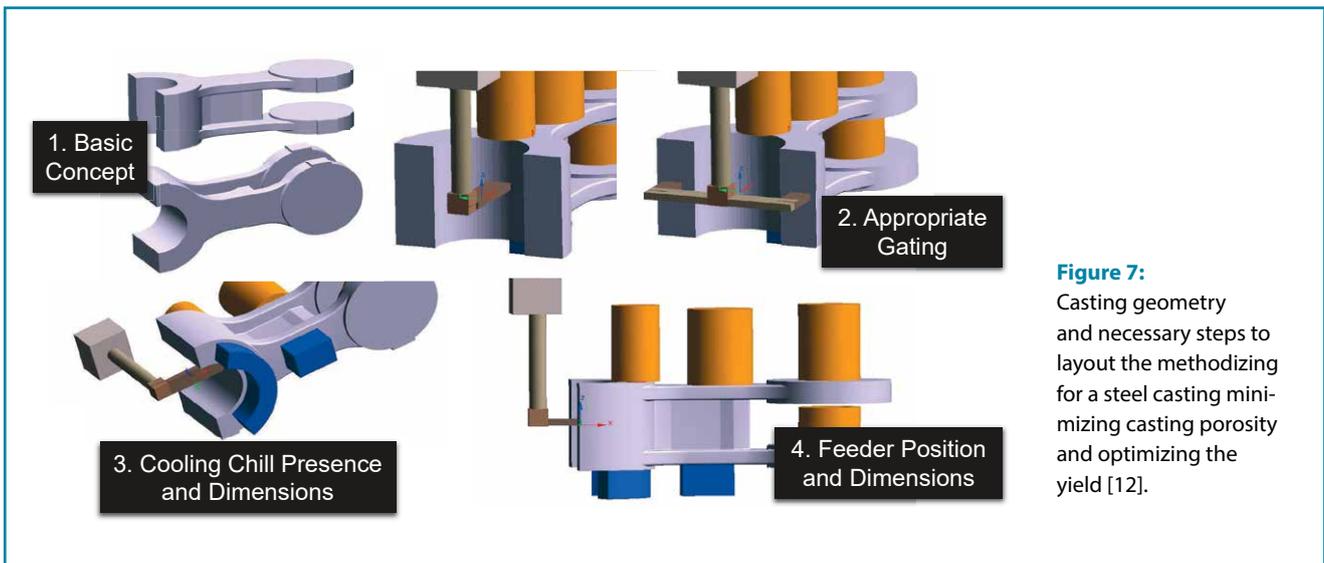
Casting geometry and necessary steps to layout the methodizing for a steel casting minimizing casting porosity and optimizing the yield [12].
